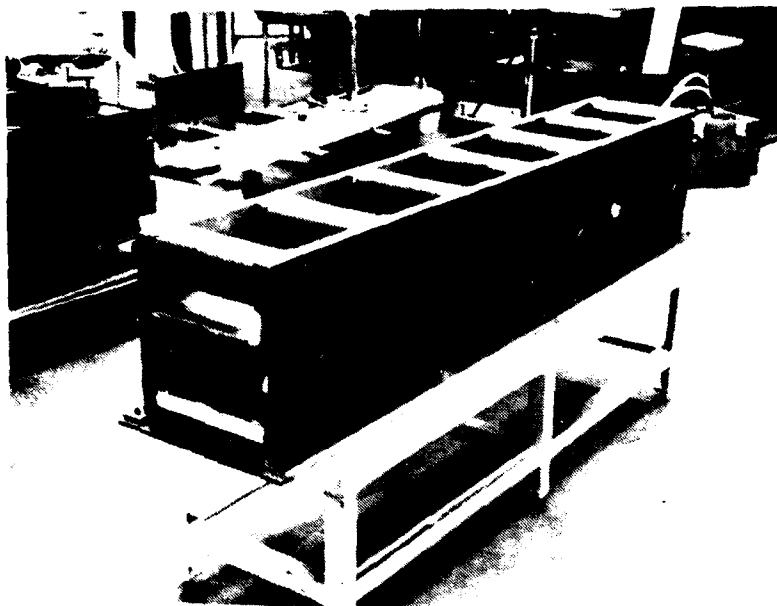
Mold Restraint Structure with Viewing Ports.
